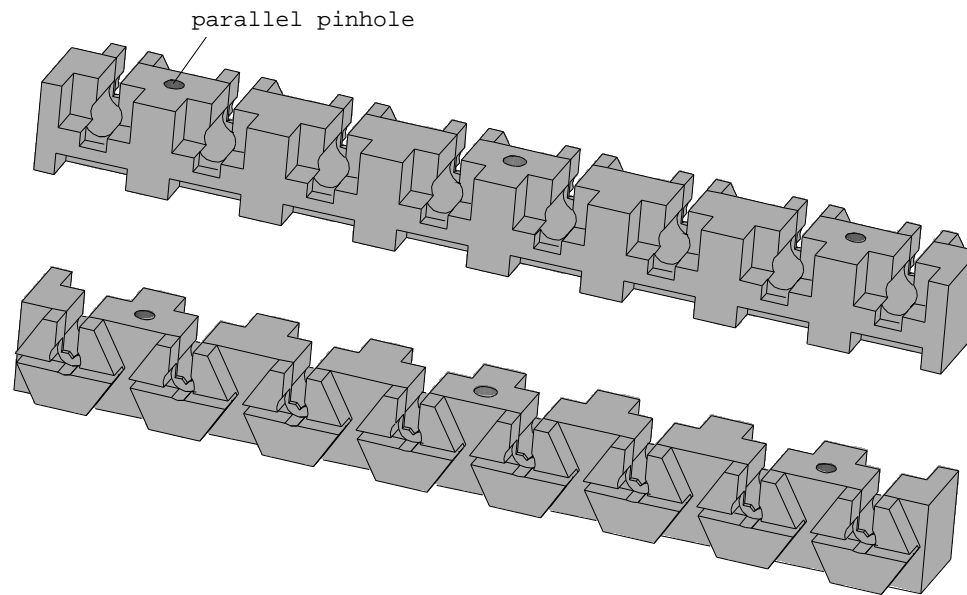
Schematic assembly of a monolayer. The foil-template and end-combs are shown.
